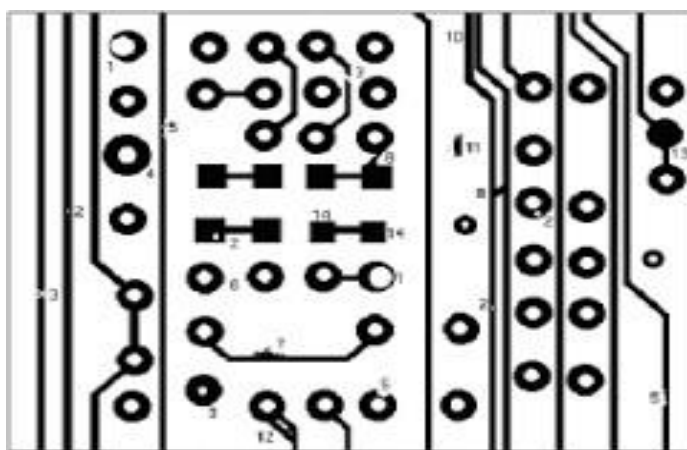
An Example of Defective PCB Patterns
